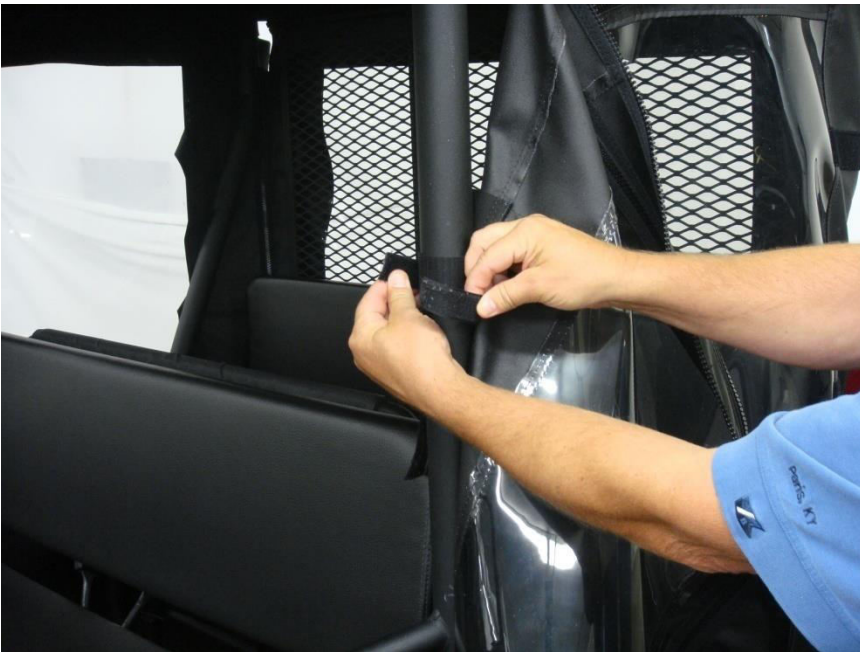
attach Center Roll Bar upright enclosure tabs to installed 6" Velcro strips at the center and top of the Roll Bar Upright
